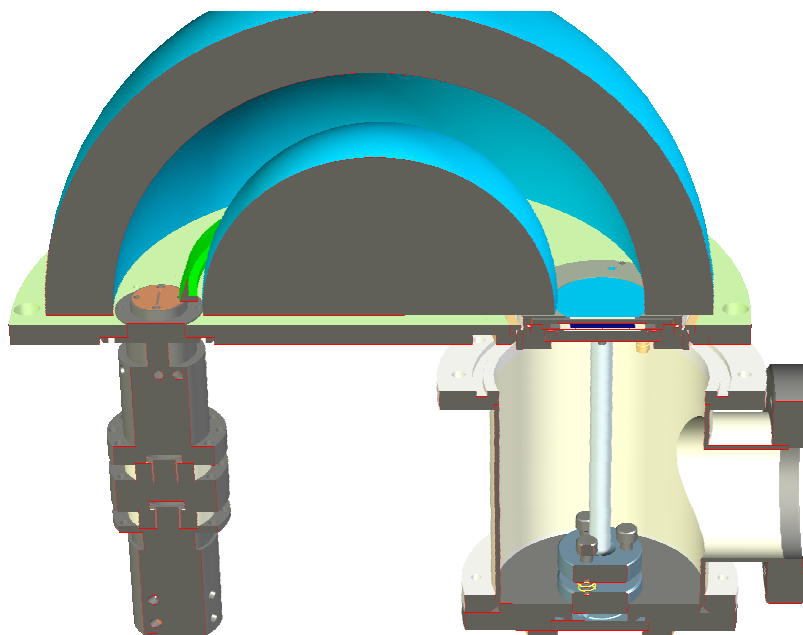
The 3D cross-sectional view of the hemispherical analyzer housing the new 2D detector assembly.
